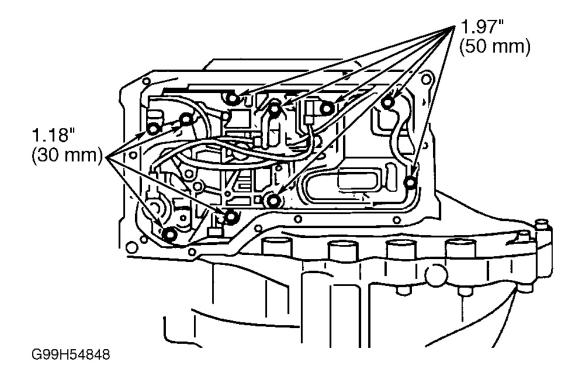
Locating Valve Body Bolts Courtesy of FORD MOTOR CO.
